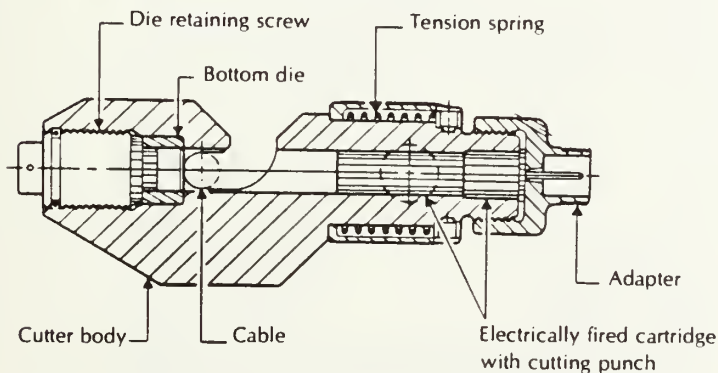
Explosively actuated underwater cable cutter. (Courtesy of Mine Safety Appliances Co., Pittsburgh, Pennsylvania.)
